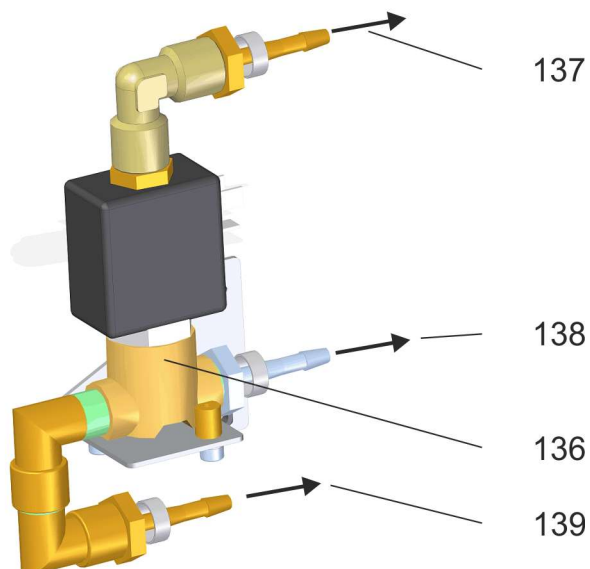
Spare part: blow-down filling assembly for cleaning version
